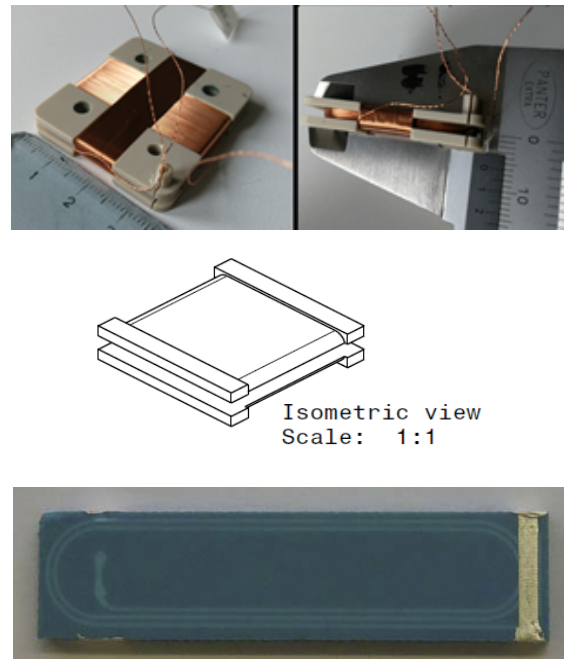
Reduced size mock-up of ex-vessel pick up coils (up), CAD design of coil former for in-vessel pick up coils (mid), picture LTCC coil for TCV (Reprinted from [3,4]).
